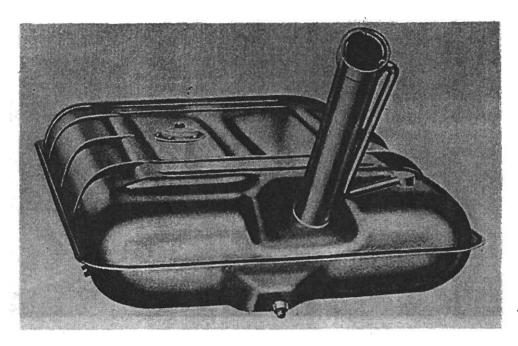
Two Steel Stampings Roll-Welded Together at Their Flanges Form the Fuel Tank Shell.
